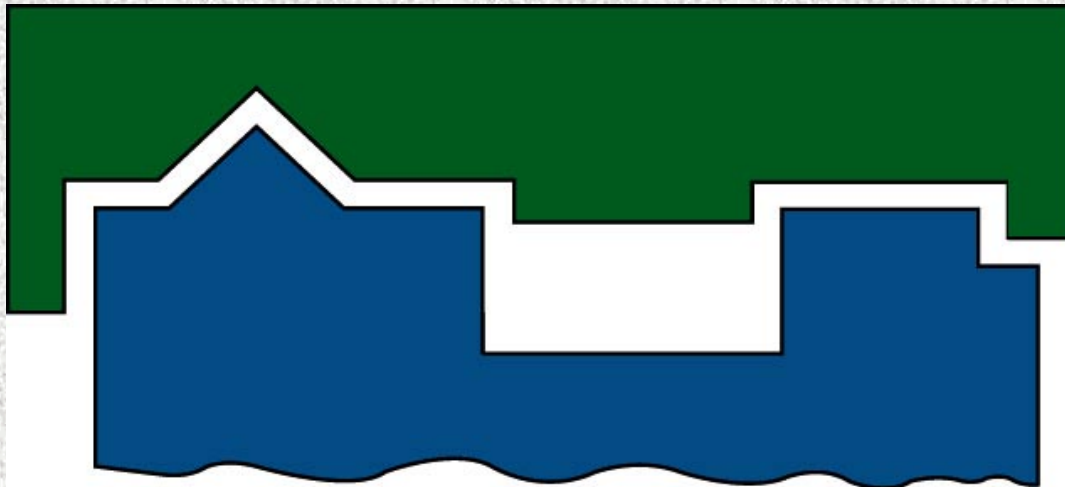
Cross-section of a machine tool slideway. The width, depth, angles, and other dimensions must be produced and measured accurately for the machine tool to function as expected.
